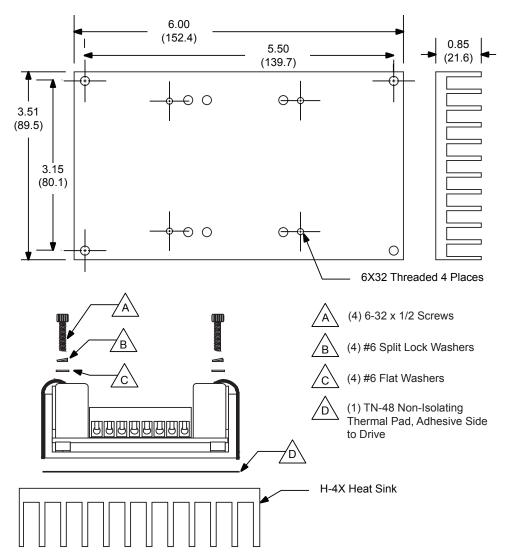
H-4x Heat Sink Kit Dimensions and Mounting Instructions
